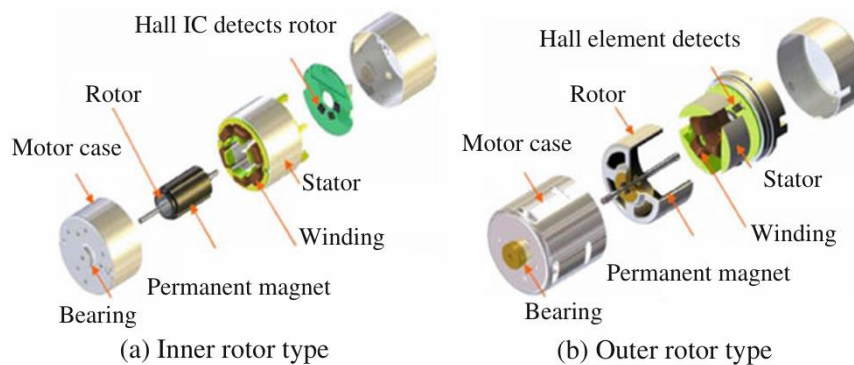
Assembly of the components of the two types of BLDC motor configurations. [3]
